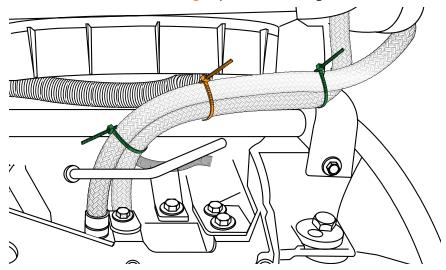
Replacing the Fan Shroud Wire Clip with Push-In Cable-Tie
